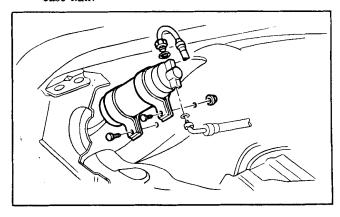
A-115 Receiver Dehydrator Assembly - X Series
